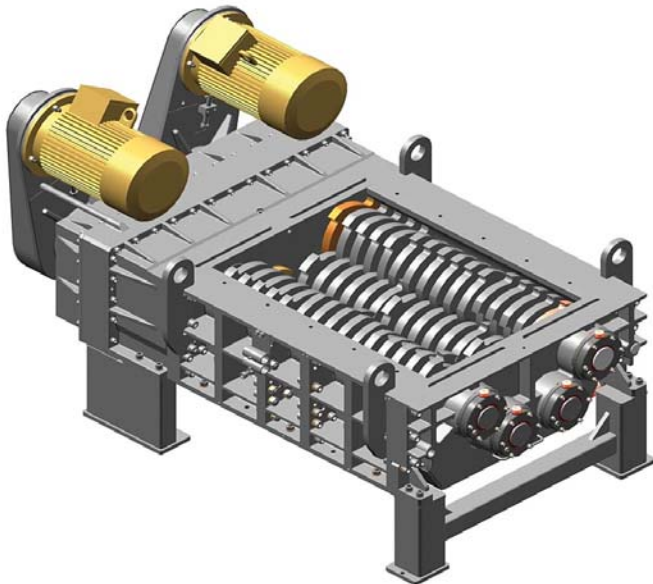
CAD drawing of Tryco Untha Quad shaft shredder [Tyrco].
